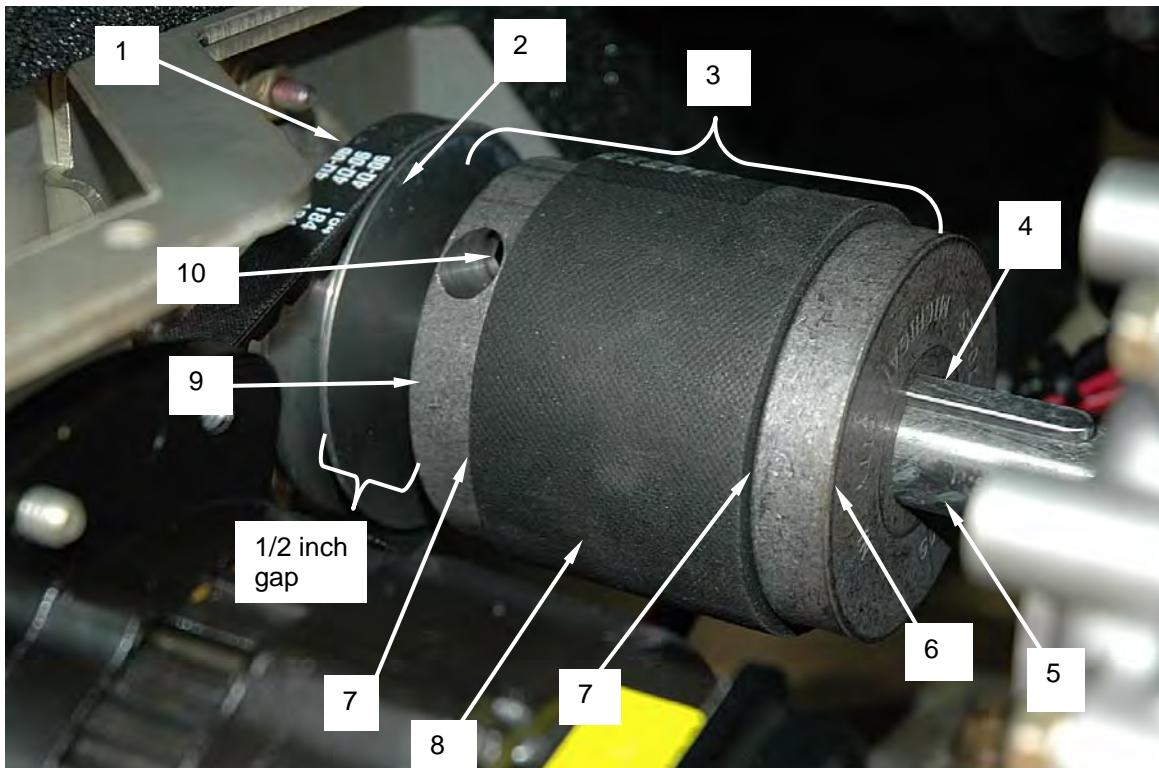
Replace Flexible Coupling Assembly (Sheet 1 of 2).
